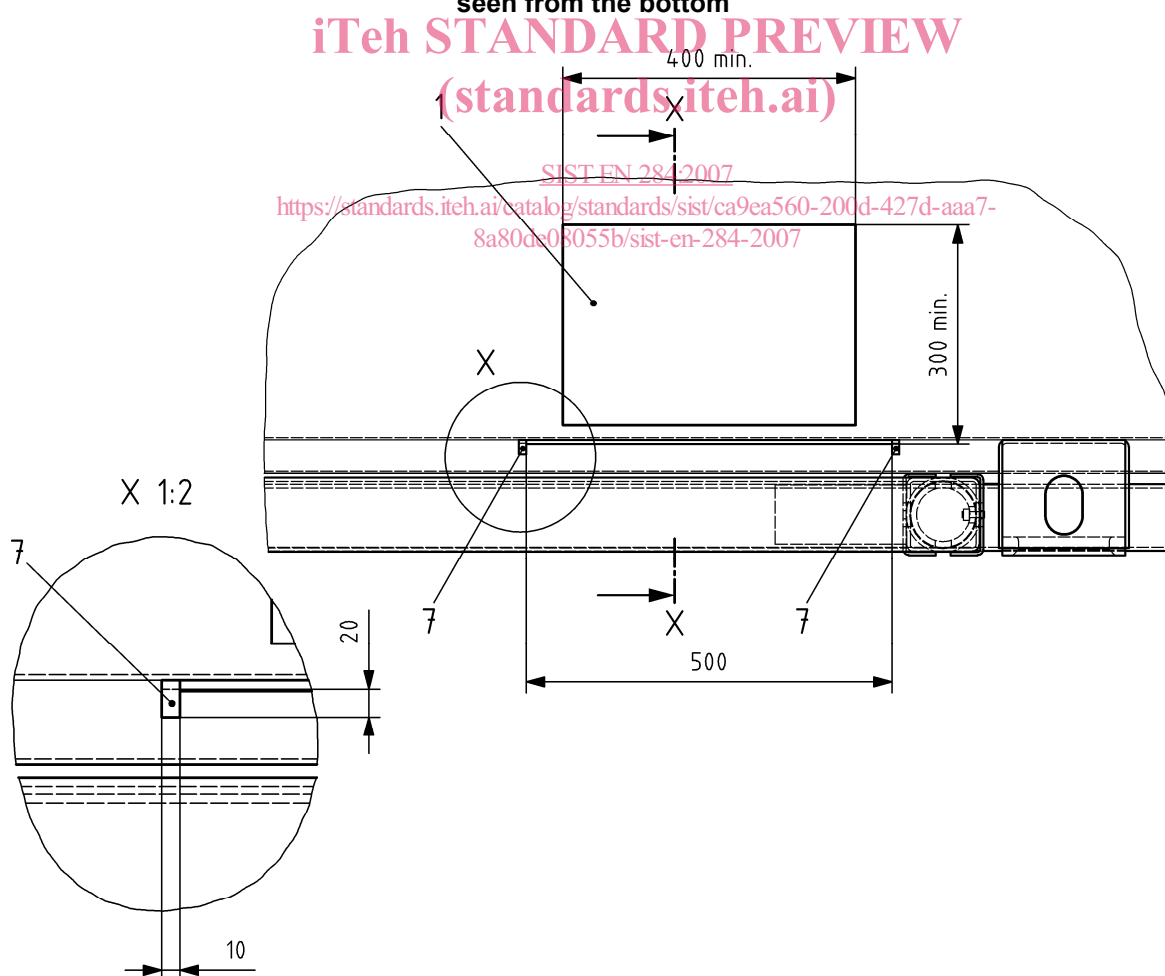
Grappler flange safety lip, end stops and wear-resistant plate – side view
